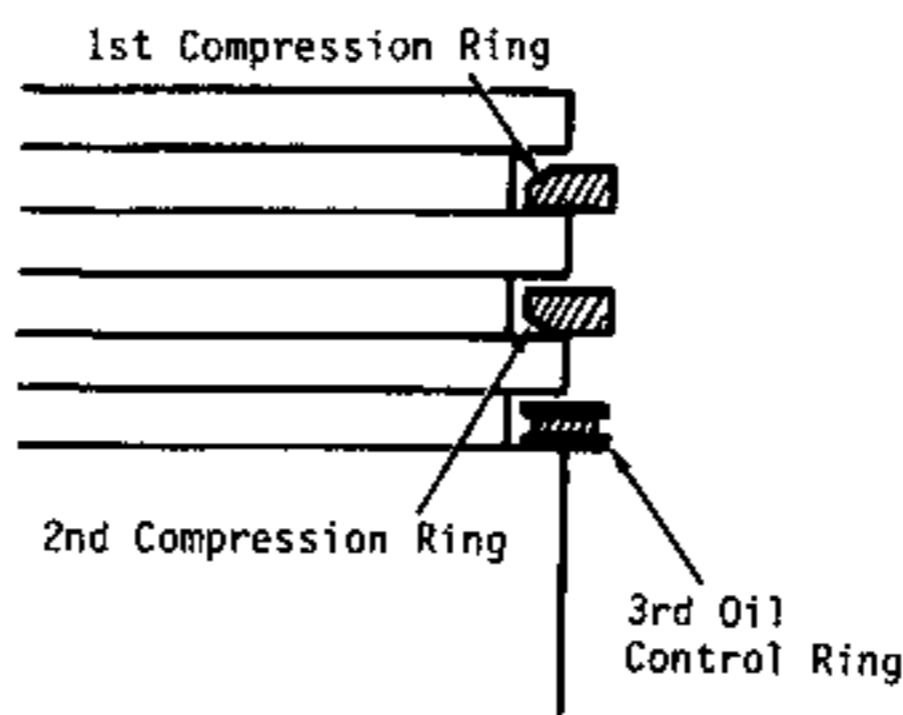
Piston rings must be installed on piston so chamfered edge of top ring is facing up and chamfered edge of second ring is facing down.
